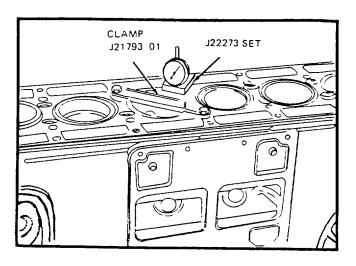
Checking Distance of Liner Flange Below Top Face of Block.
